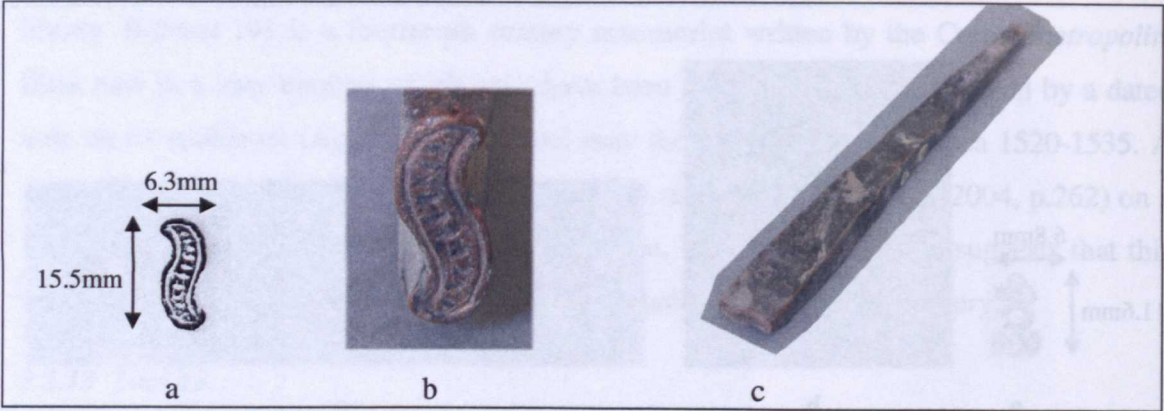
Tool 15: a) actual size smoke proof, b) photograph of face, c) general view
